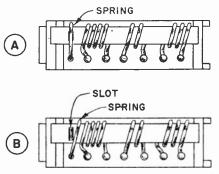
How to get the oscillator coil slug back in place when it is run in too far.
